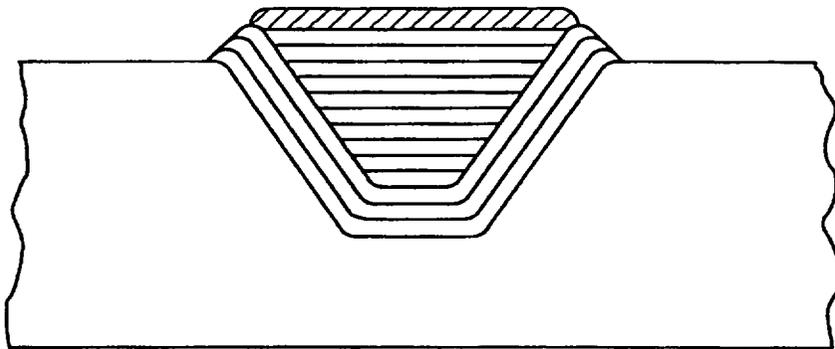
AUTOMATIC OR MACHINE (GTAW) TEMPER BEAD WELDING
